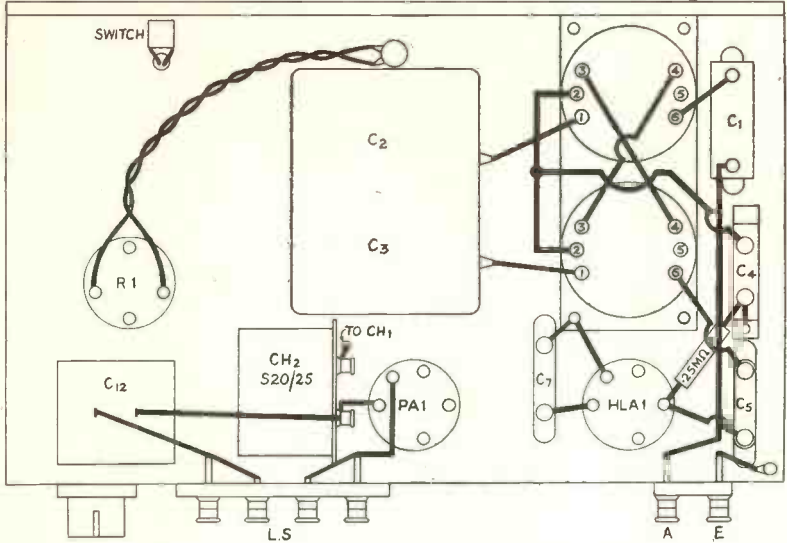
THE LAYOUT AND WIRING OF THE UPPER SIDE OF THE BASEBOARD.
